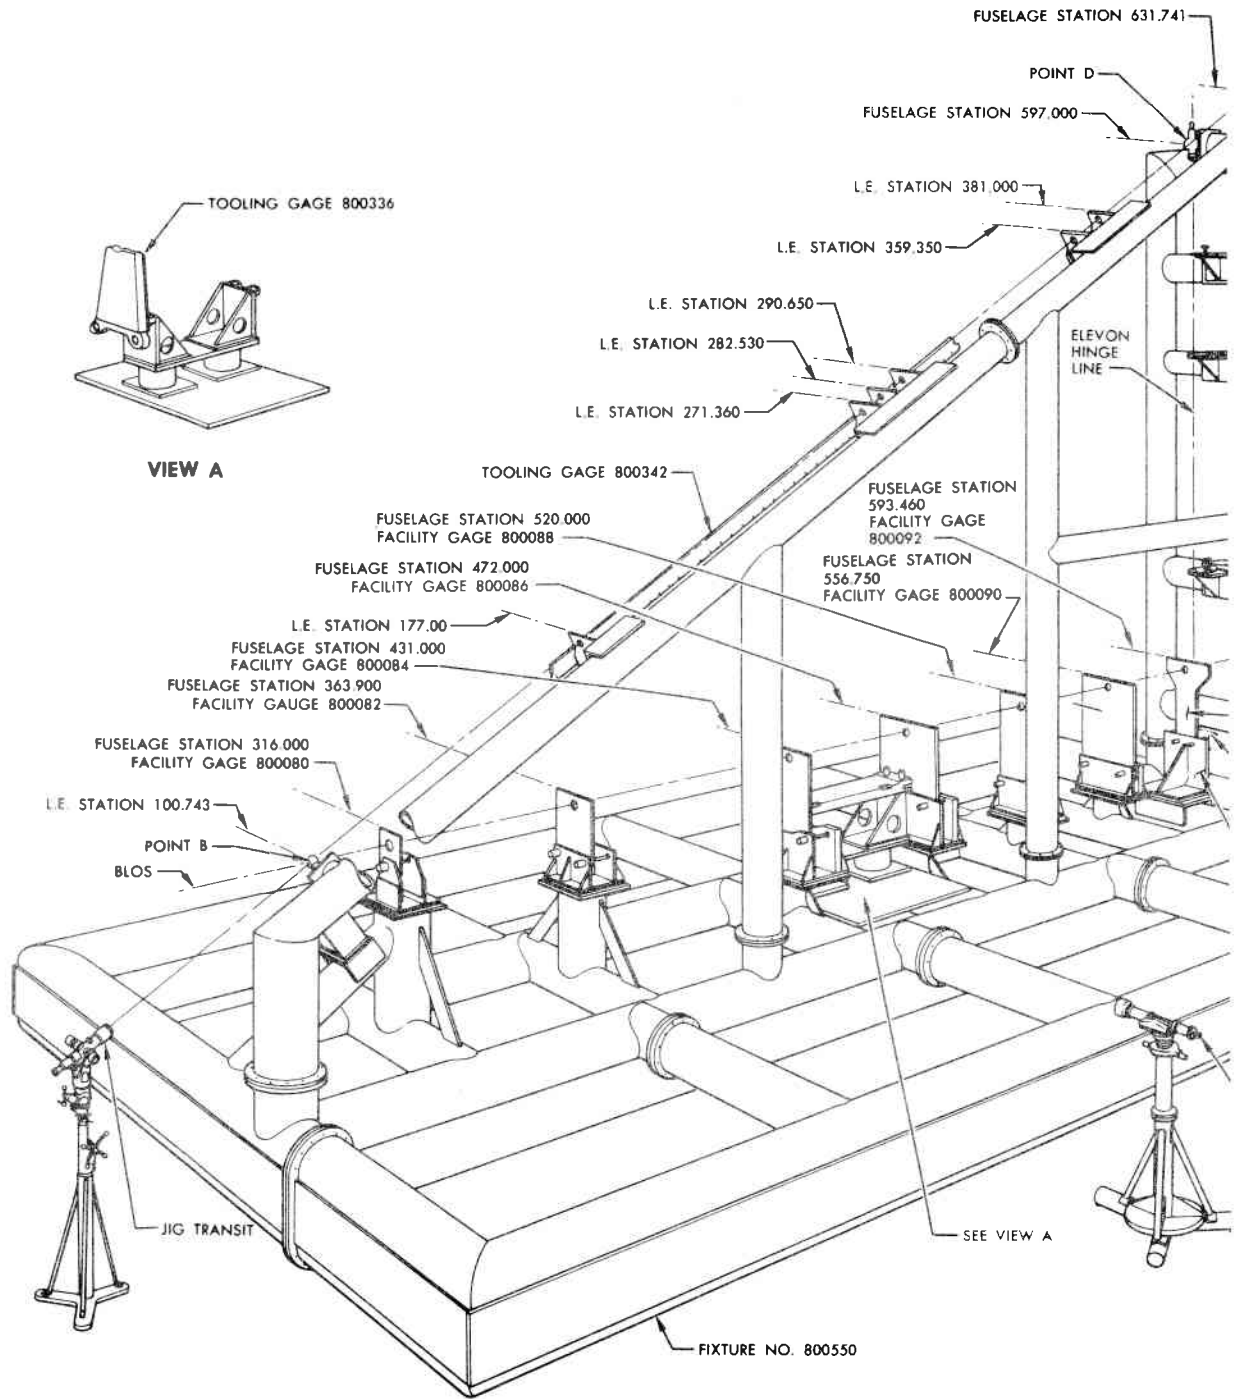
Master Tooling — Elevon Assembly, Outboard Left-Hand (Sheet 2 of 2)
